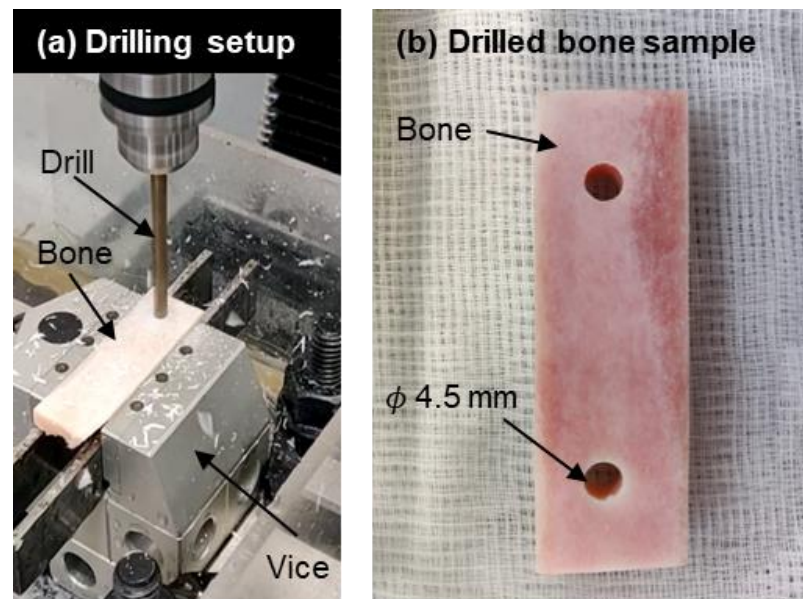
Milling machine (770 PCNC Tormach) used in this study for orthogonal cutting and drilling trials.
